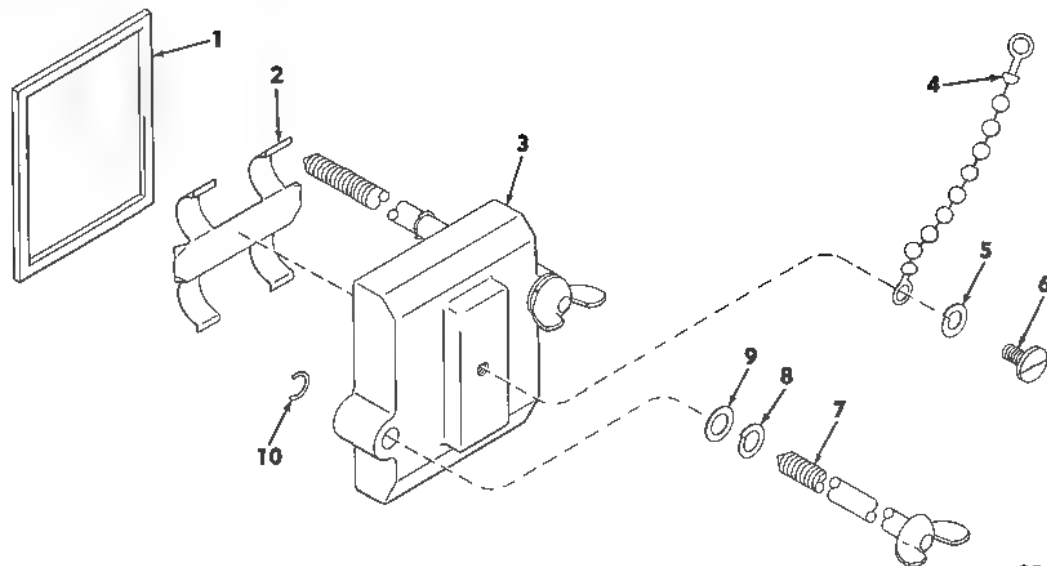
SUPPORT, WAVEGUIDE /9016679/-EXPLODED VIEW
